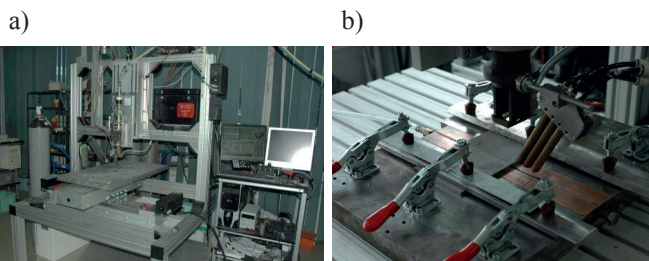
A view of the prototype experimental stand for automated laser welding (a) equipped with the fixture device and shielding nozzles for protection of weld pool and root of the weld (b), Table 3
